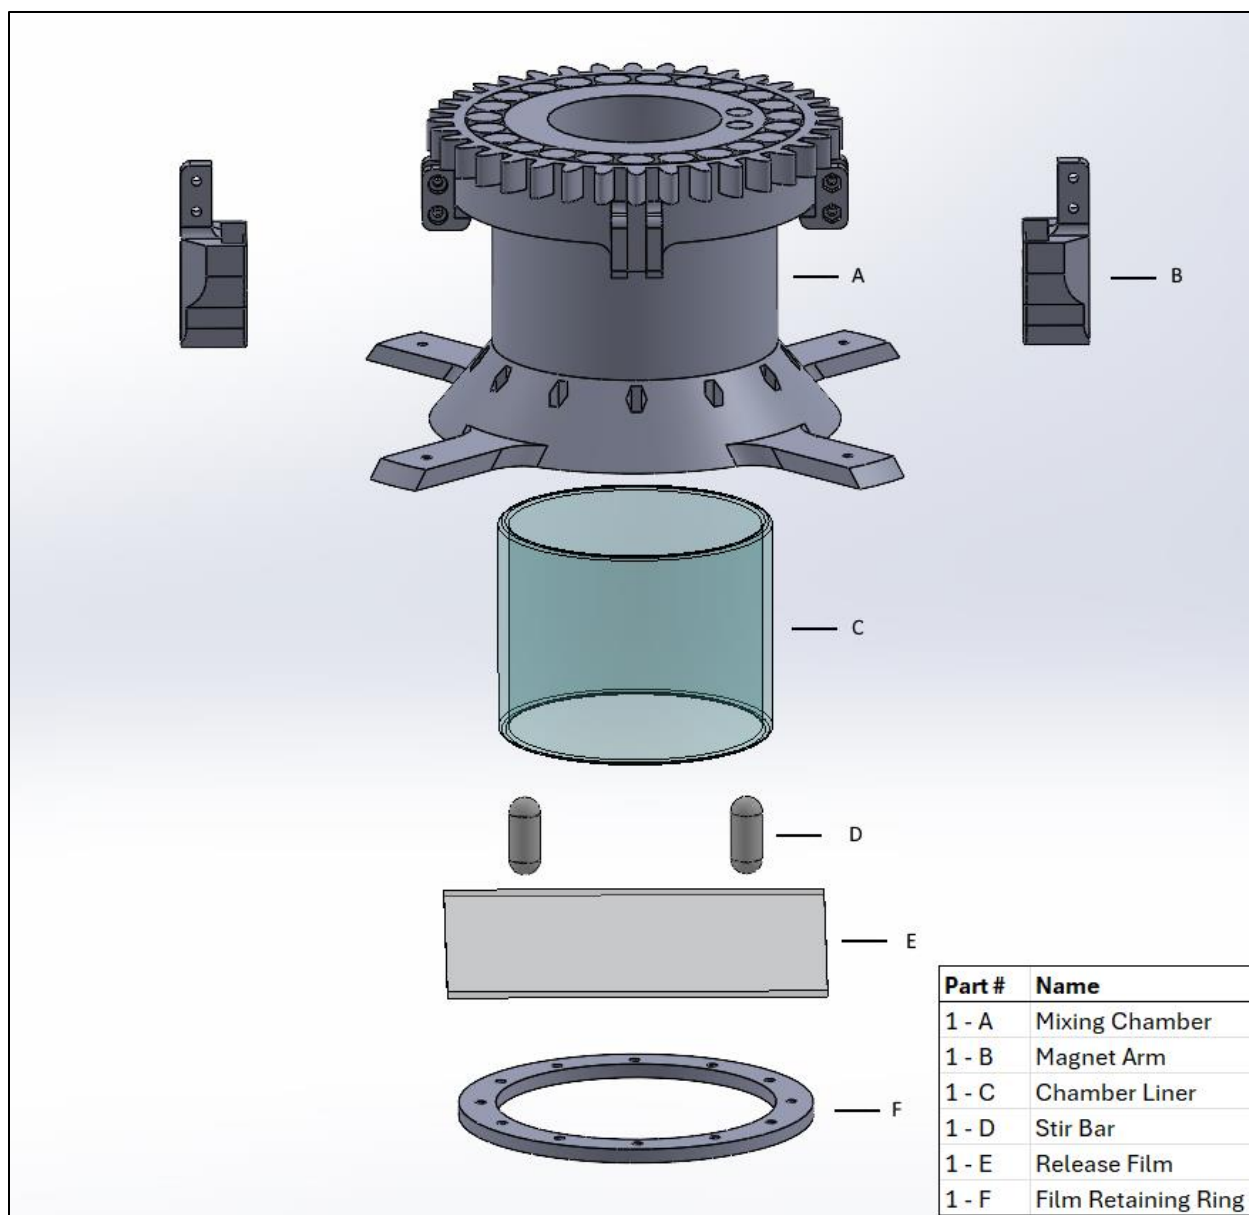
3D rendered exploded view of part 1, the mixing chamber assembly, showing all sub-components.
